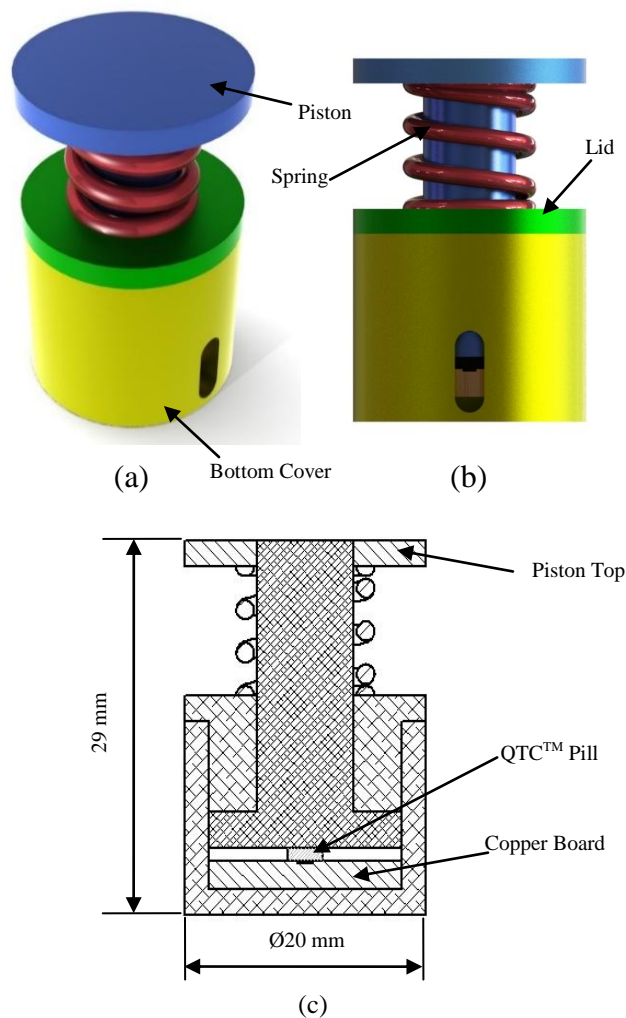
Conceptual Design of the proposed structure; (a) Isometric view. (b) Front elevation. (c) Sectional front elevation
